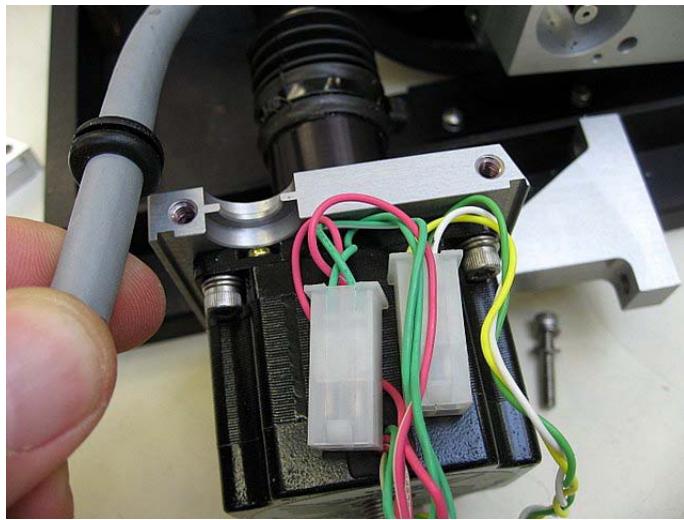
Disconnecting Molex connectors and removing flex cable
